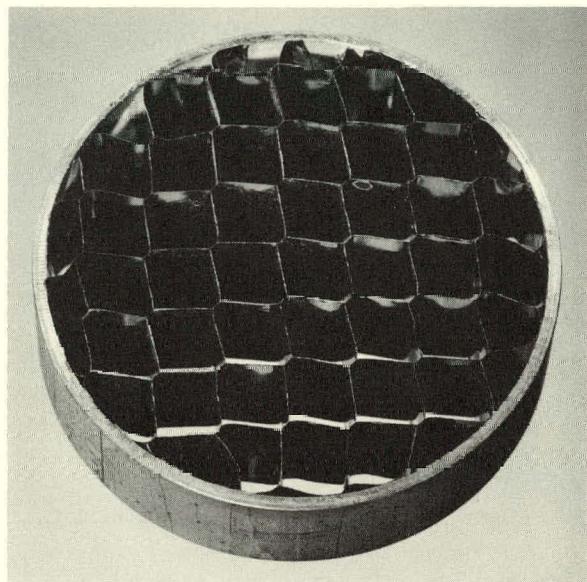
Honeycomb fuel assembly model using 0.255-mil stainless steel foil.
